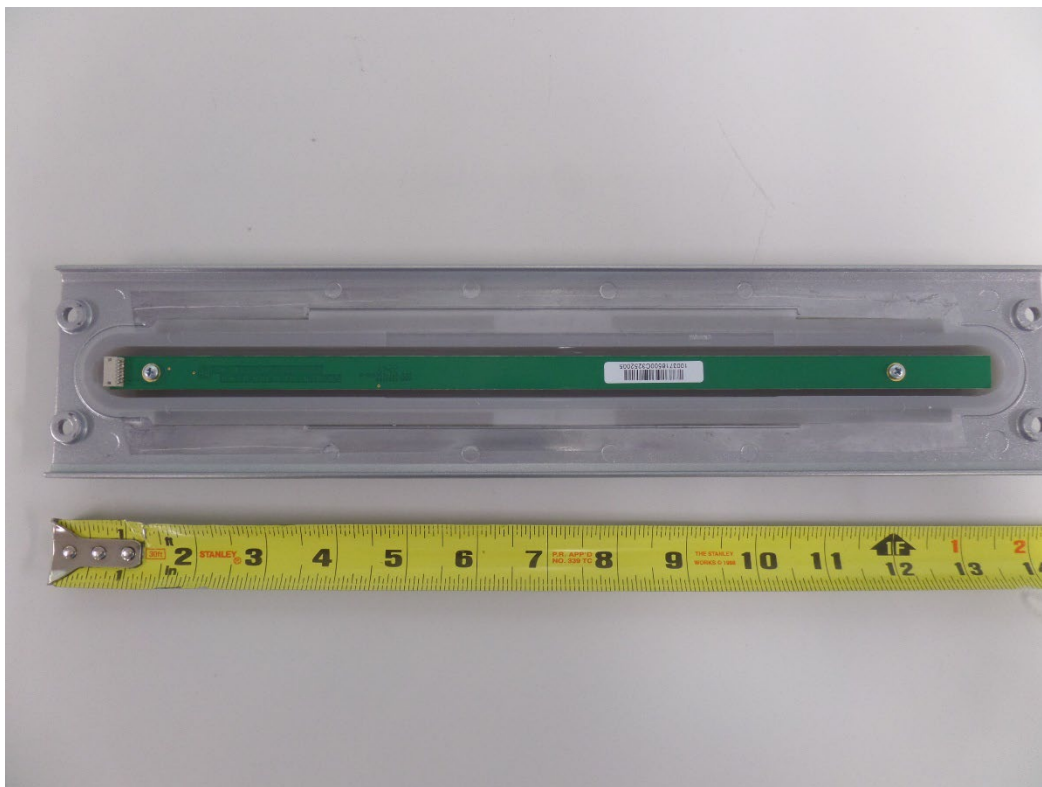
NP12 PRI/PAB/SAB RF ANT FRAME LED BOARD BOTTOM SIDE
